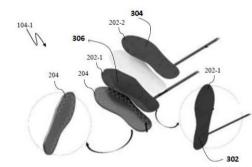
Exploded view of the first footwear showing internal compone nts.
